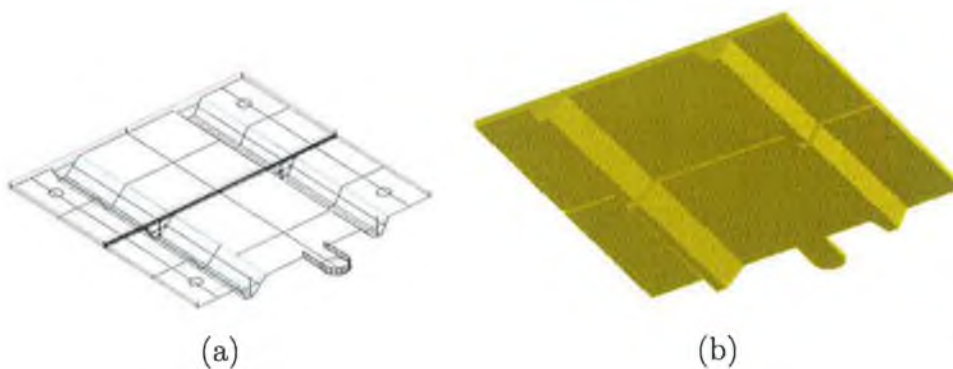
(a) CAD design of mould for enhanced waveguide platforms. (b) 3D preview of machined part produced by CAM software.
